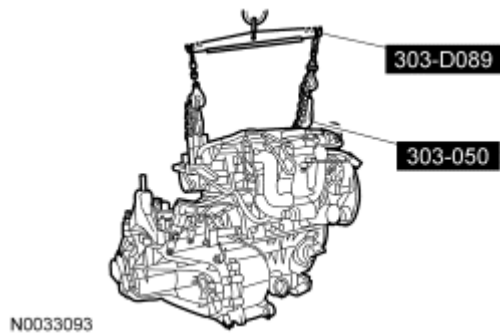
Identifying Special Tools (303-D089, 303-050)
